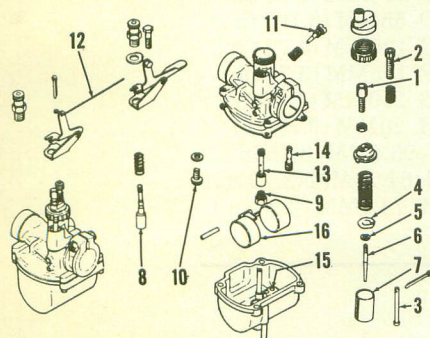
Exploded view of Mikuni VM carburetor. Starting valves for both carburetors are connected with rod (12).
